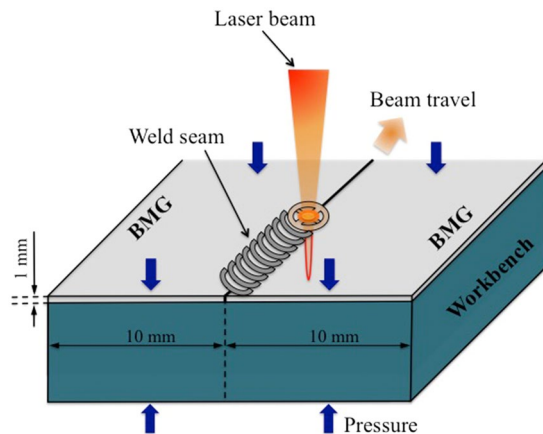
Schematic of the pulsed laser butt welding. A laser beam of controllable power was used to weld metallic glass pieces. The orange arrow indicates the direction of the laser beam is travelling.
